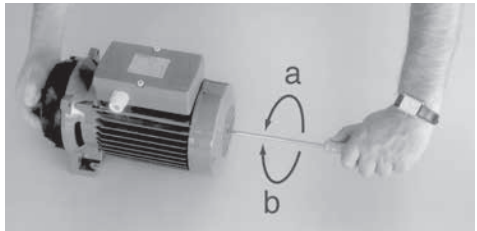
Dismantling (a) and remounting (b) the impeller
